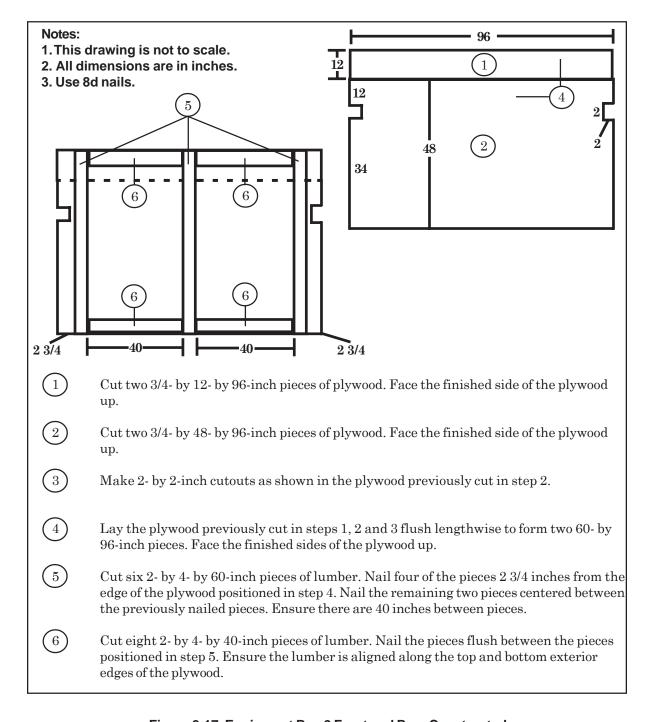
Equipment Box 2 Front and Rear Constructed
